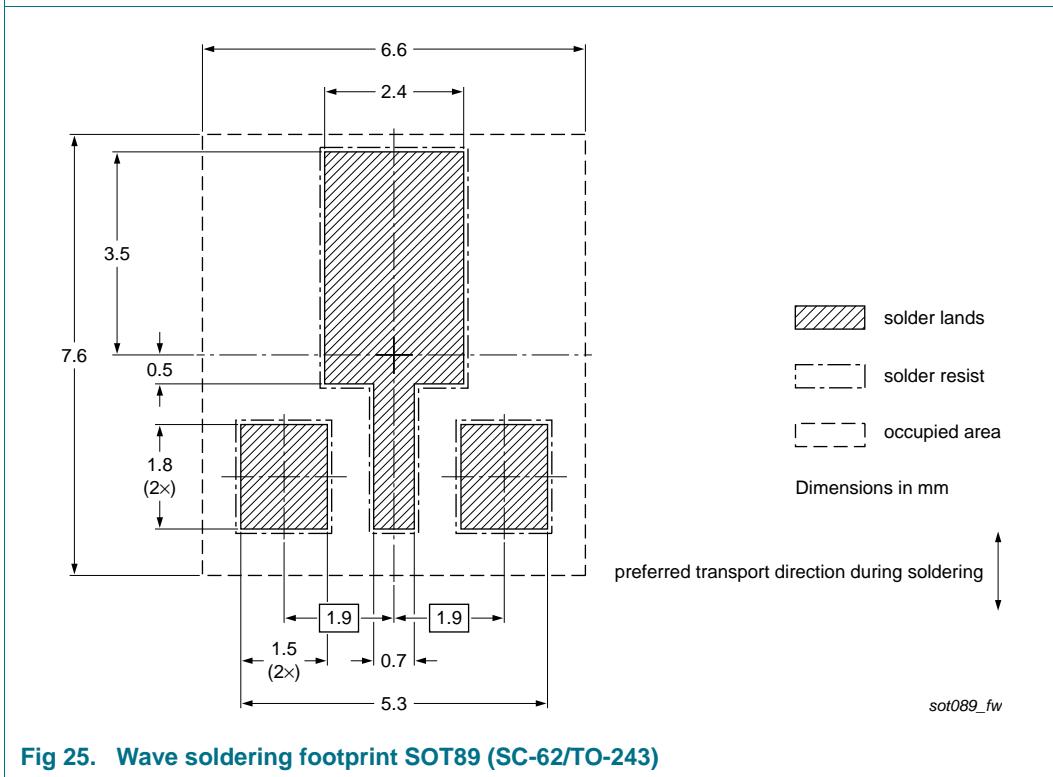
Wave soldering footprint SOT89 (SC-62/TO-243)
